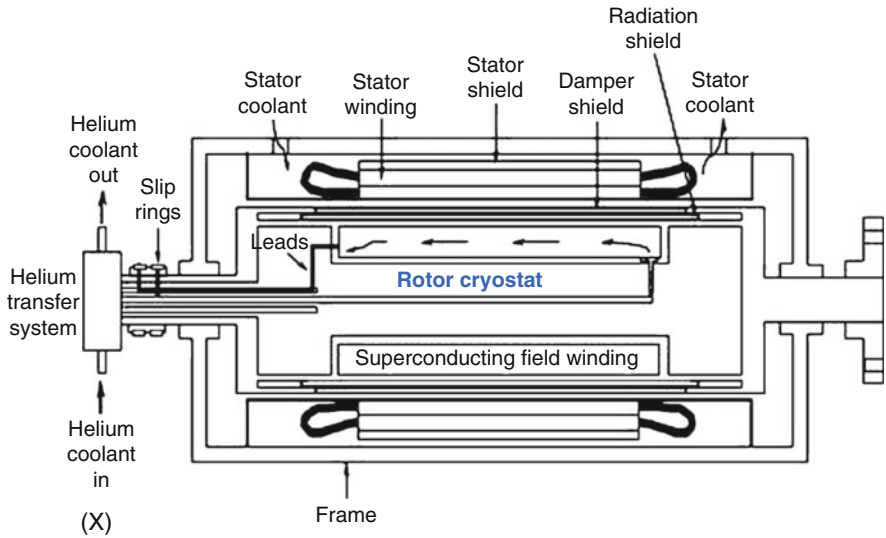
LTS SC generator basic components with rotor cryostat [9]
